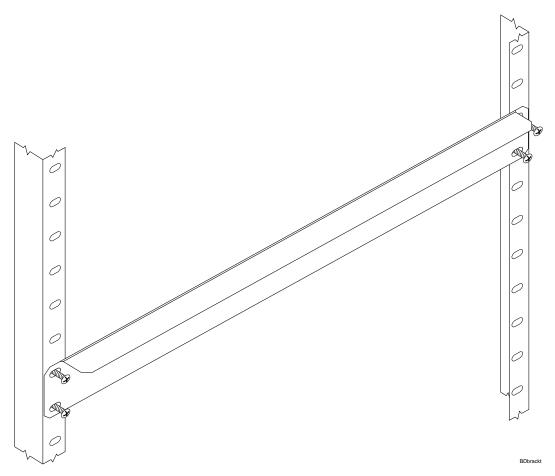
Helper bracket for mounting the Alpine 3800 series chassis
